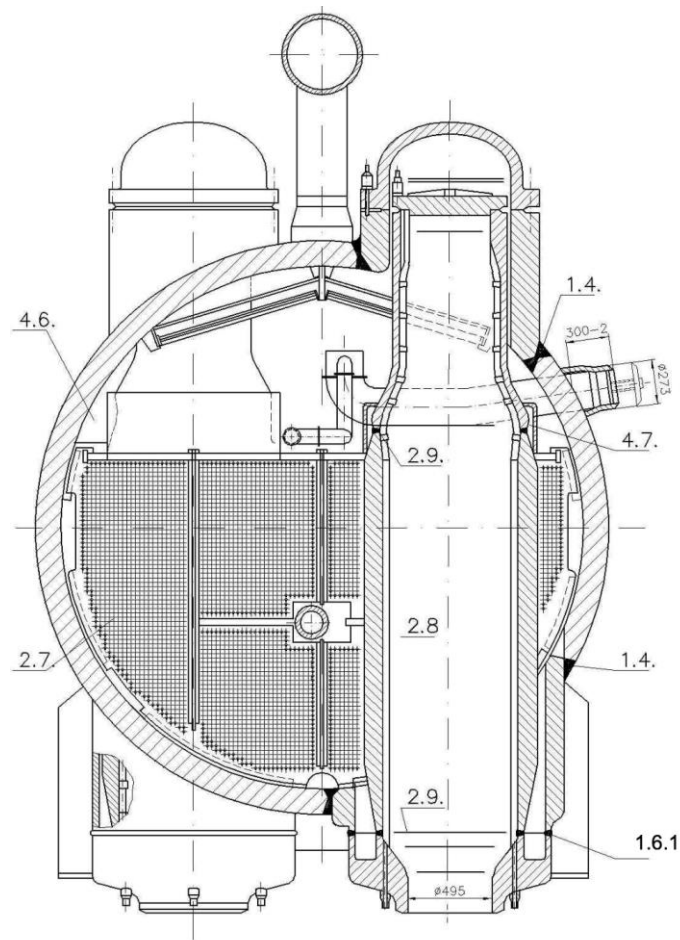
Cross-section of the WWER-440/213 steam generator showing the welds at the collector area. The Dissimilar Material Weld is indicated as 1.6.1.
